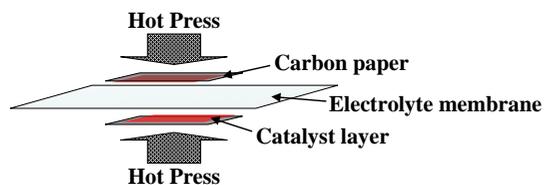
Fabrication of the MEA by hot pressing carbon paper and electrolyte membrane
